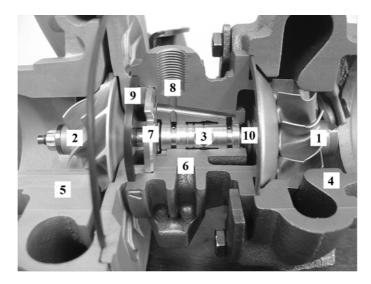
Construction of turbocharger: 1 – turbine rotor, 2 – compressor rotor, 3 – slide bearing, 4 – turbine housing, 5 – compressor housing, 6 – central housing, 7 – thrust bearing, 8 – oil channel, 9 – sealing ring, 10 – shaft
